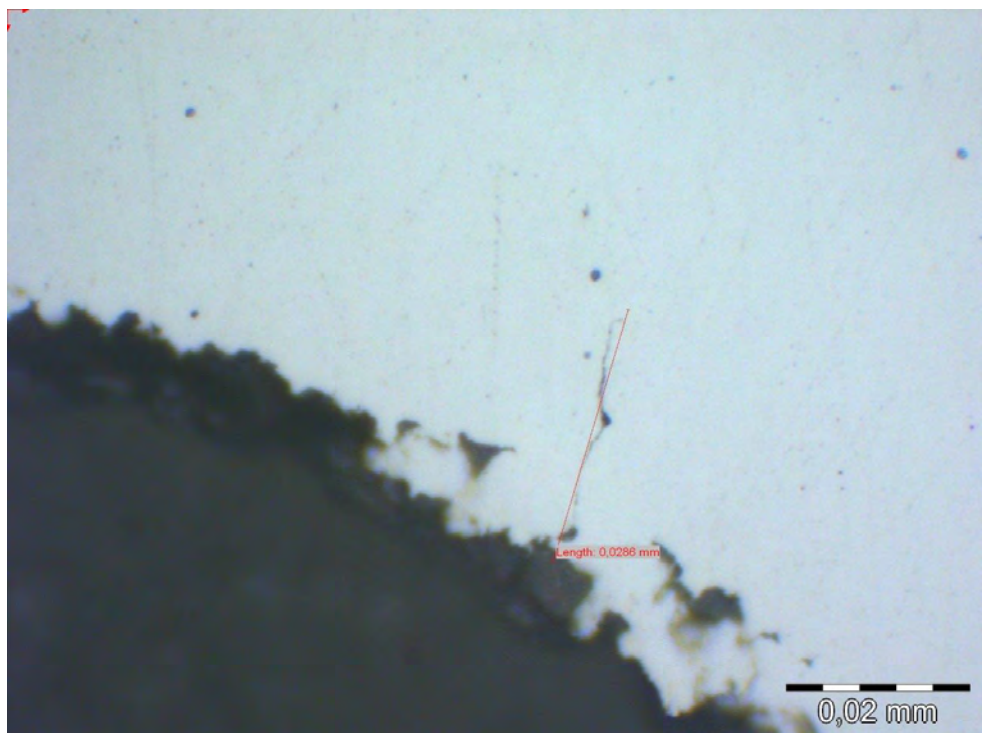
Crack at segment A, fourth ridge on barrel no. 14389
